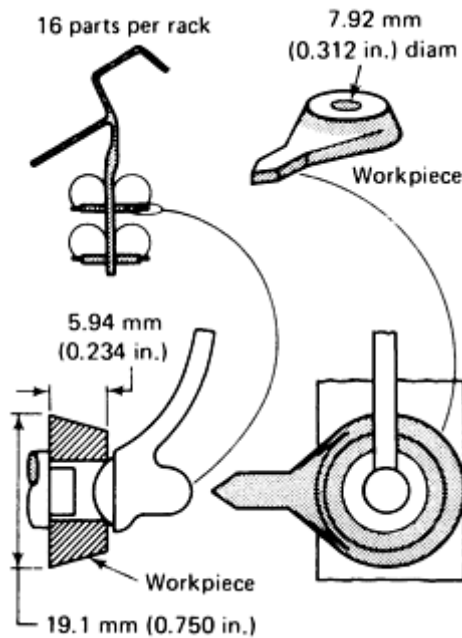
Racking arrangement to prevent plating of chromium in the hole of a shift lever
